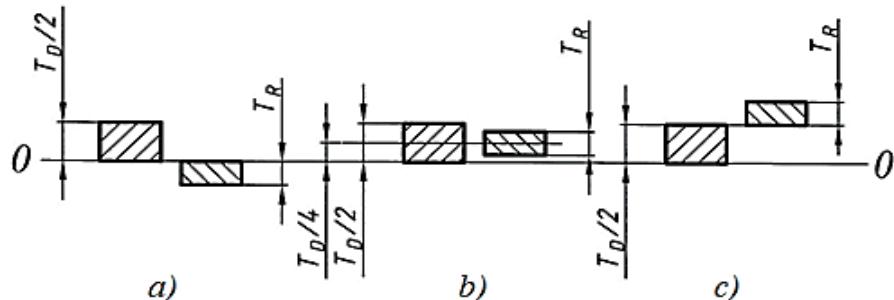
Layout of clearance fields for shaft-hole biaxial connections in the hole system
